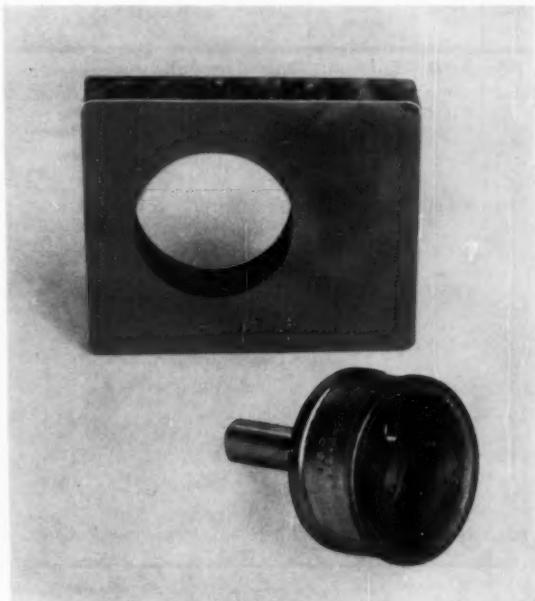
This clean hole was made through a honeycomb sandwich by electrolytically assisted grinding techniques. Angular holes in the top surface of the metal-bonded cup wheel (foreground) directed the special electrolytic coolant to the cutting edge.
